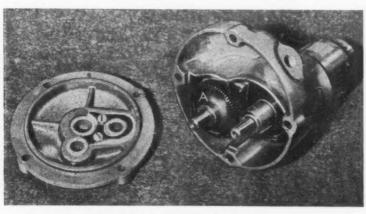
Type WD2c Gearbox and Inner Gear Plate in which Self-lubricating
